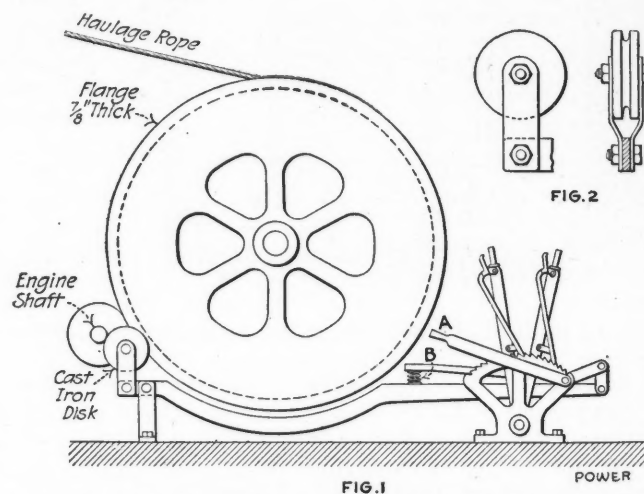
FRICTION DISK BETWEEN DRUM AND ENGINE SHAFT
